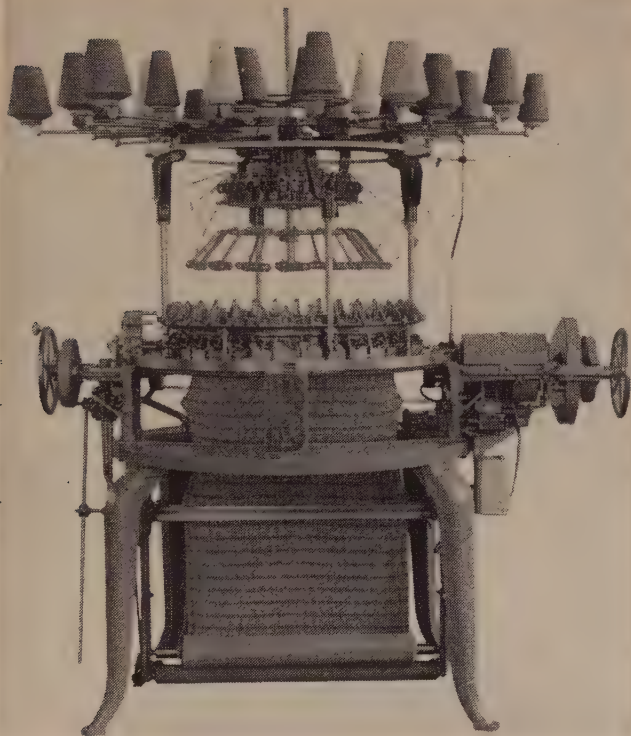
Front view of Brinton 28-inch, 32-feed, 14-cut, 1,320-needle automatic selective striping machine, Style S. S. W. with wheels and tuck bars at all feeds.
